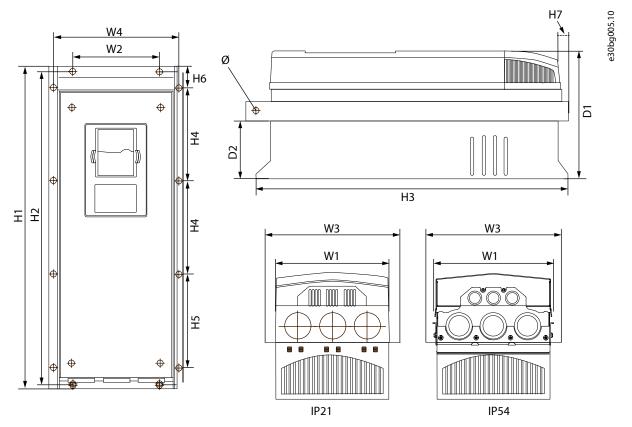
Dimensions of the VACON® NXS/NXP AC Drive with Flange, FR7–FR8
